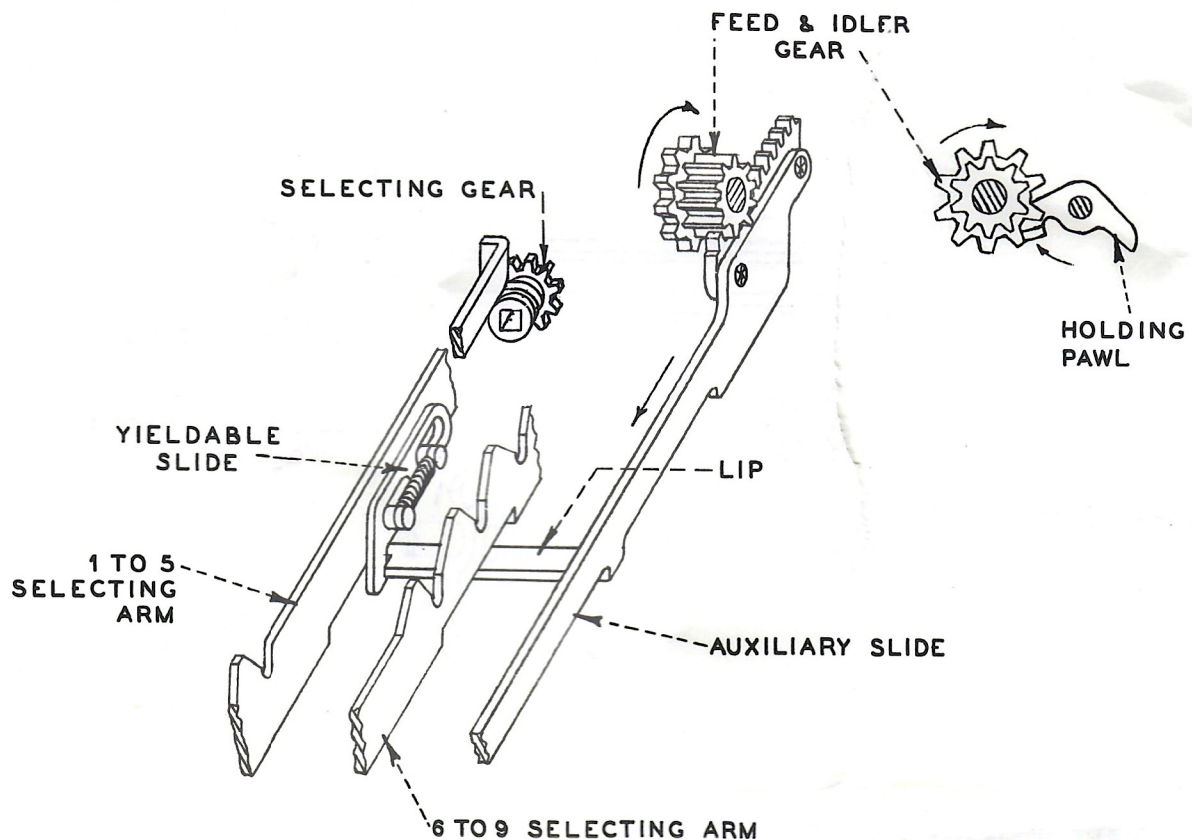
POSITIONING OF AUXILIARY SLIDES: Each movement of the feed gear shaft FIG. 10, causes the feed and idler gear to move the auxiliary slide forward one tooth position. As the auxiliary slide moves forward, its lip advances the 1 to 5 selecting arm so the selecting gear meshes with the actuator segments in a 1-2-3-4-5 order with each movement of the feed gear shaft.
